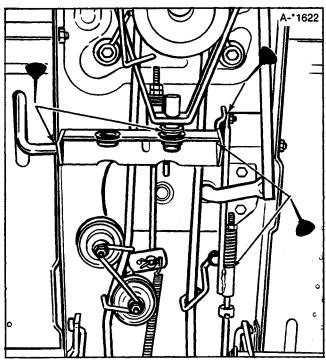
Lubricate Pivot Points of Brake Pedal, Rod and Rear Idler Pulley Bracket
